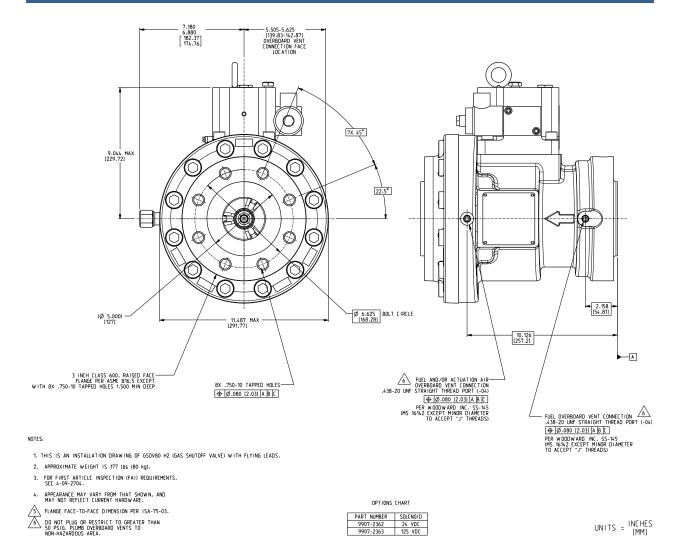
GSOV80 Flying Leads Version Outline Drawing (Side B)
